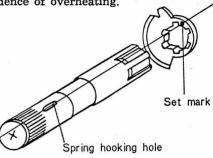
Mark on kickstarter gear should be aligned with spring hooking hole as shown.
